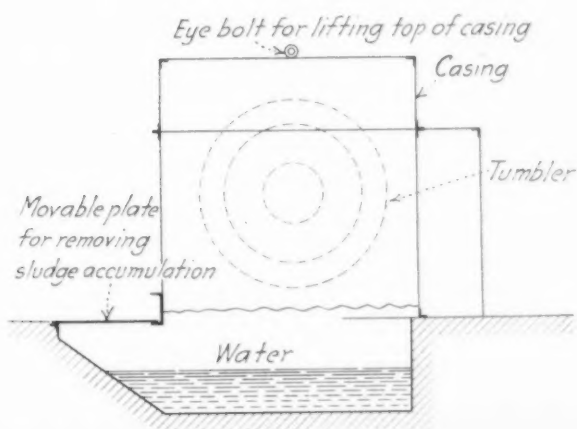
The location of the water pit and general proportions of the casing used in suppressing tumbler dust are shown in this drawing.
